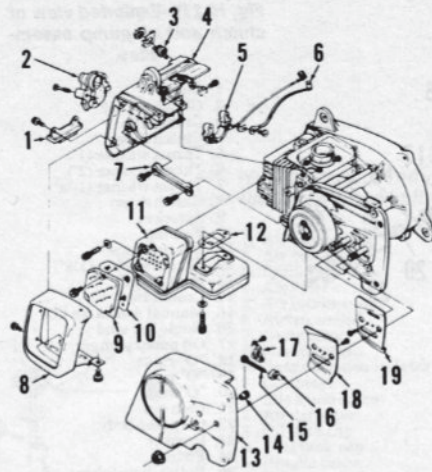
Exploded view of exhaust and chain tensioning assemblies.
